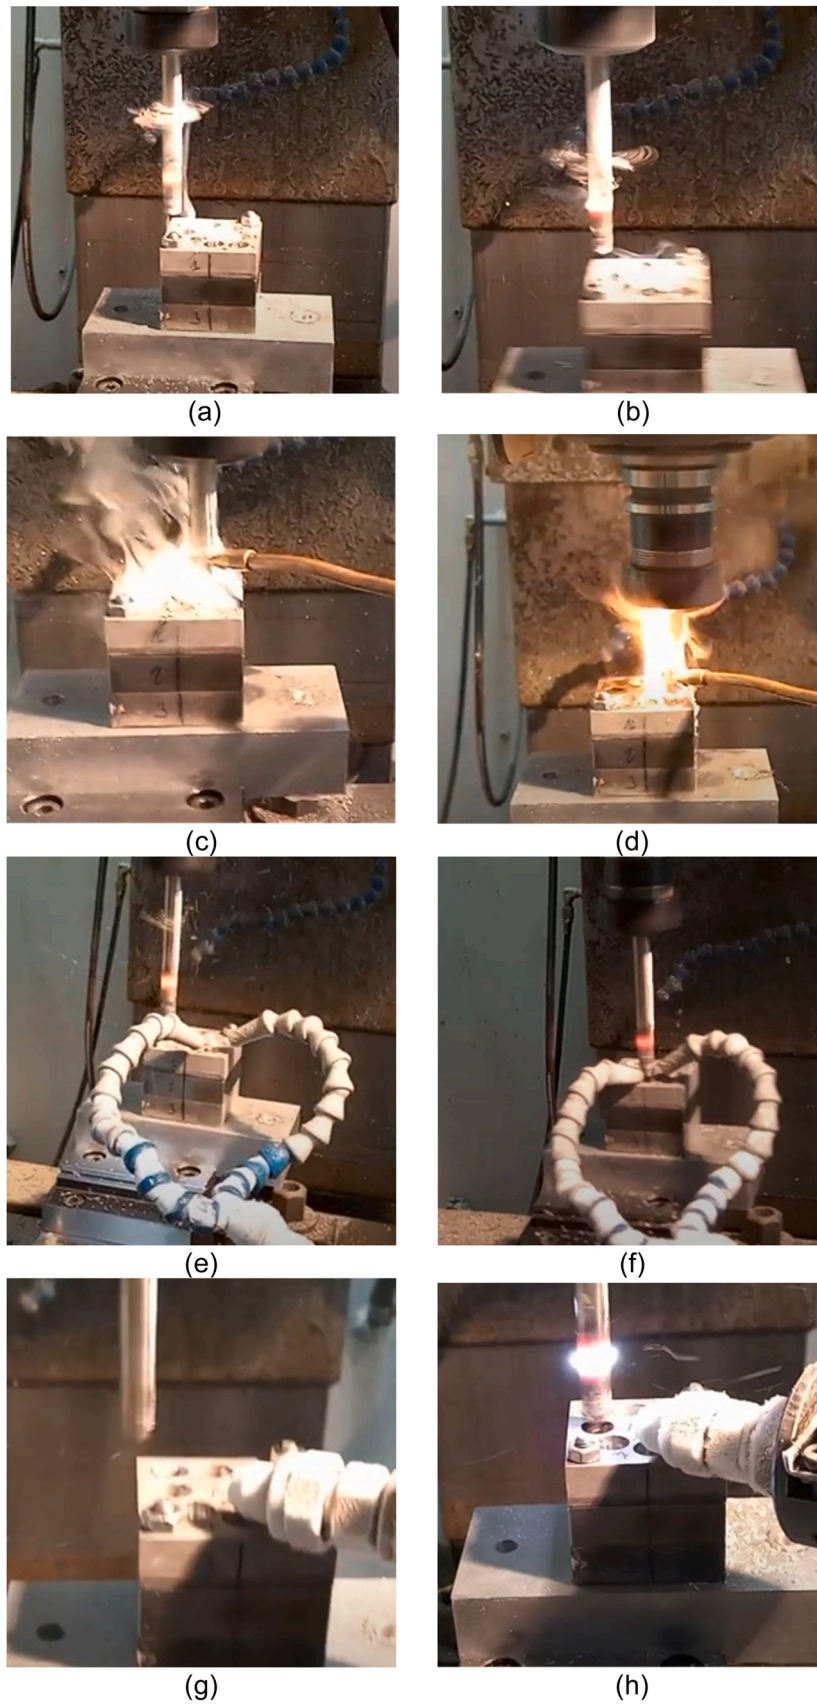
Mg-Ti-Mg. Tool exits of machining tests; (a) test 2.1; (b) test 2.2; (c) test 2.3; (d) test 2.4; (e) test 2.5; (f) test 2.6; (g) test 2.7; (h) test 2.8.
